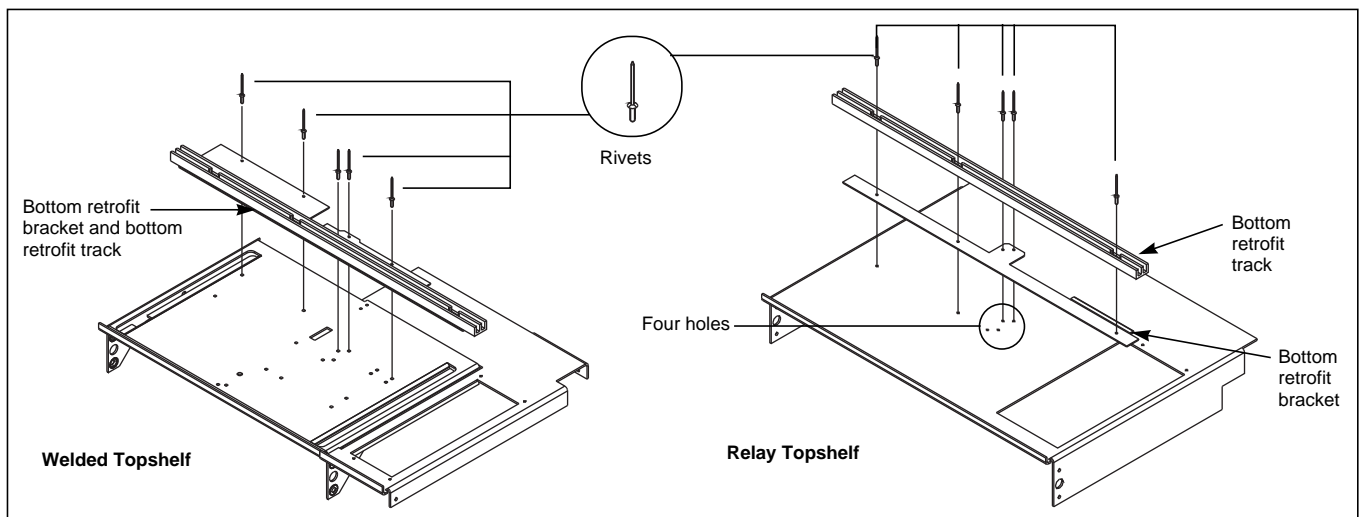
Welded and Relay Topshelf Assemblies
